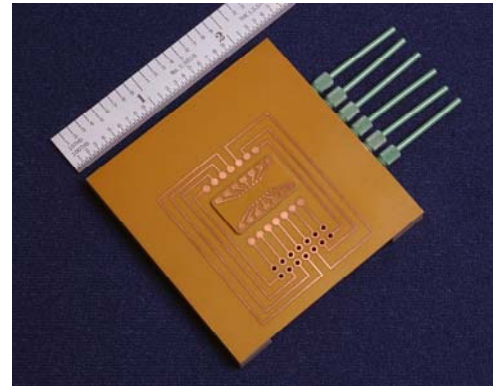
Fluidic Printed Wiring Board (FPWB) with meso-manifold and fluid connectors attached.
